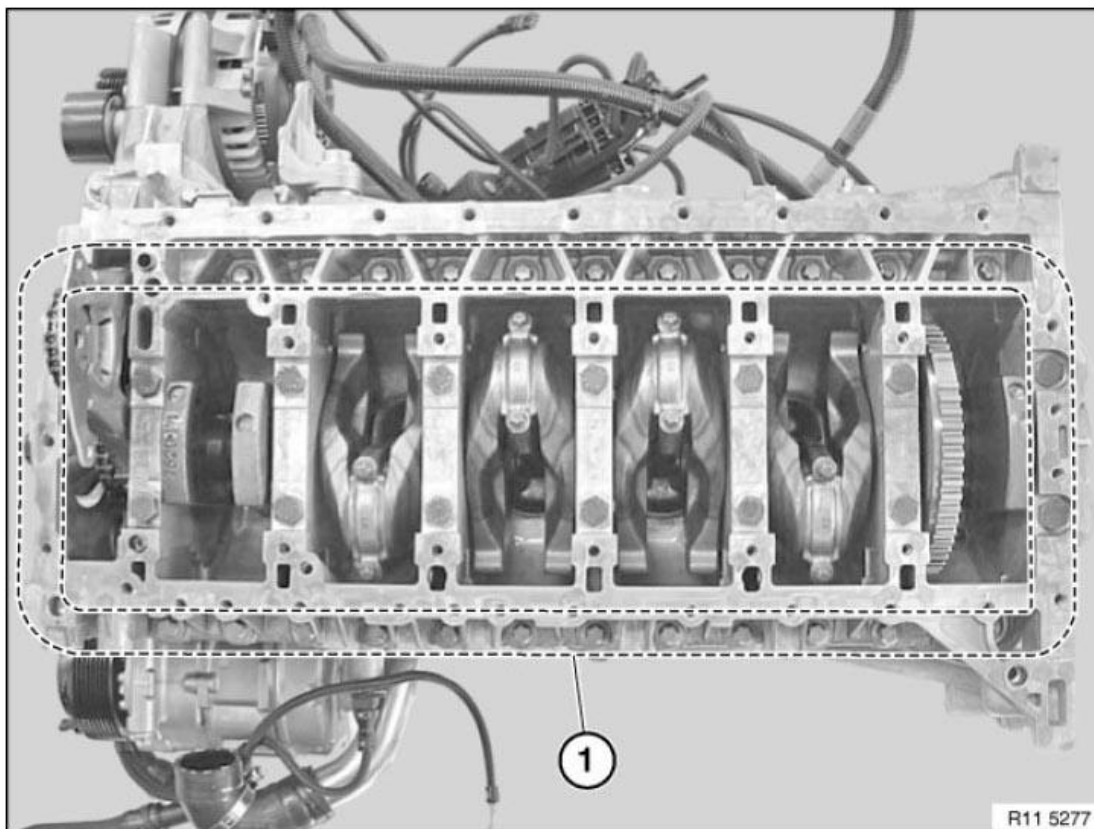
Identifying Crankshaft Bolt Mounting Area
